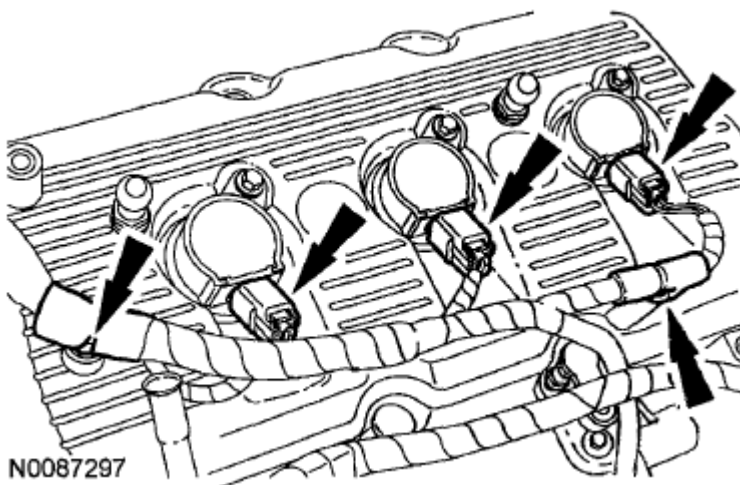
Locating LH Coil-On-Plug Electrical Connectors
